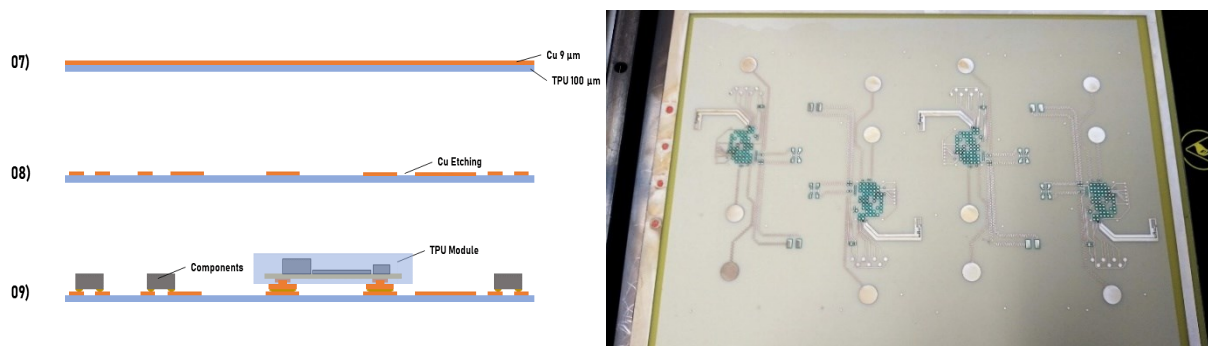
Left: Process flow patch integration. Right: Patch layer on rigid carrier after structuring before assembly
